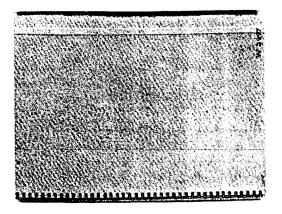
Section of Hat Sweat (full size) Showing Stitching Produced by Machine 107 w 9
